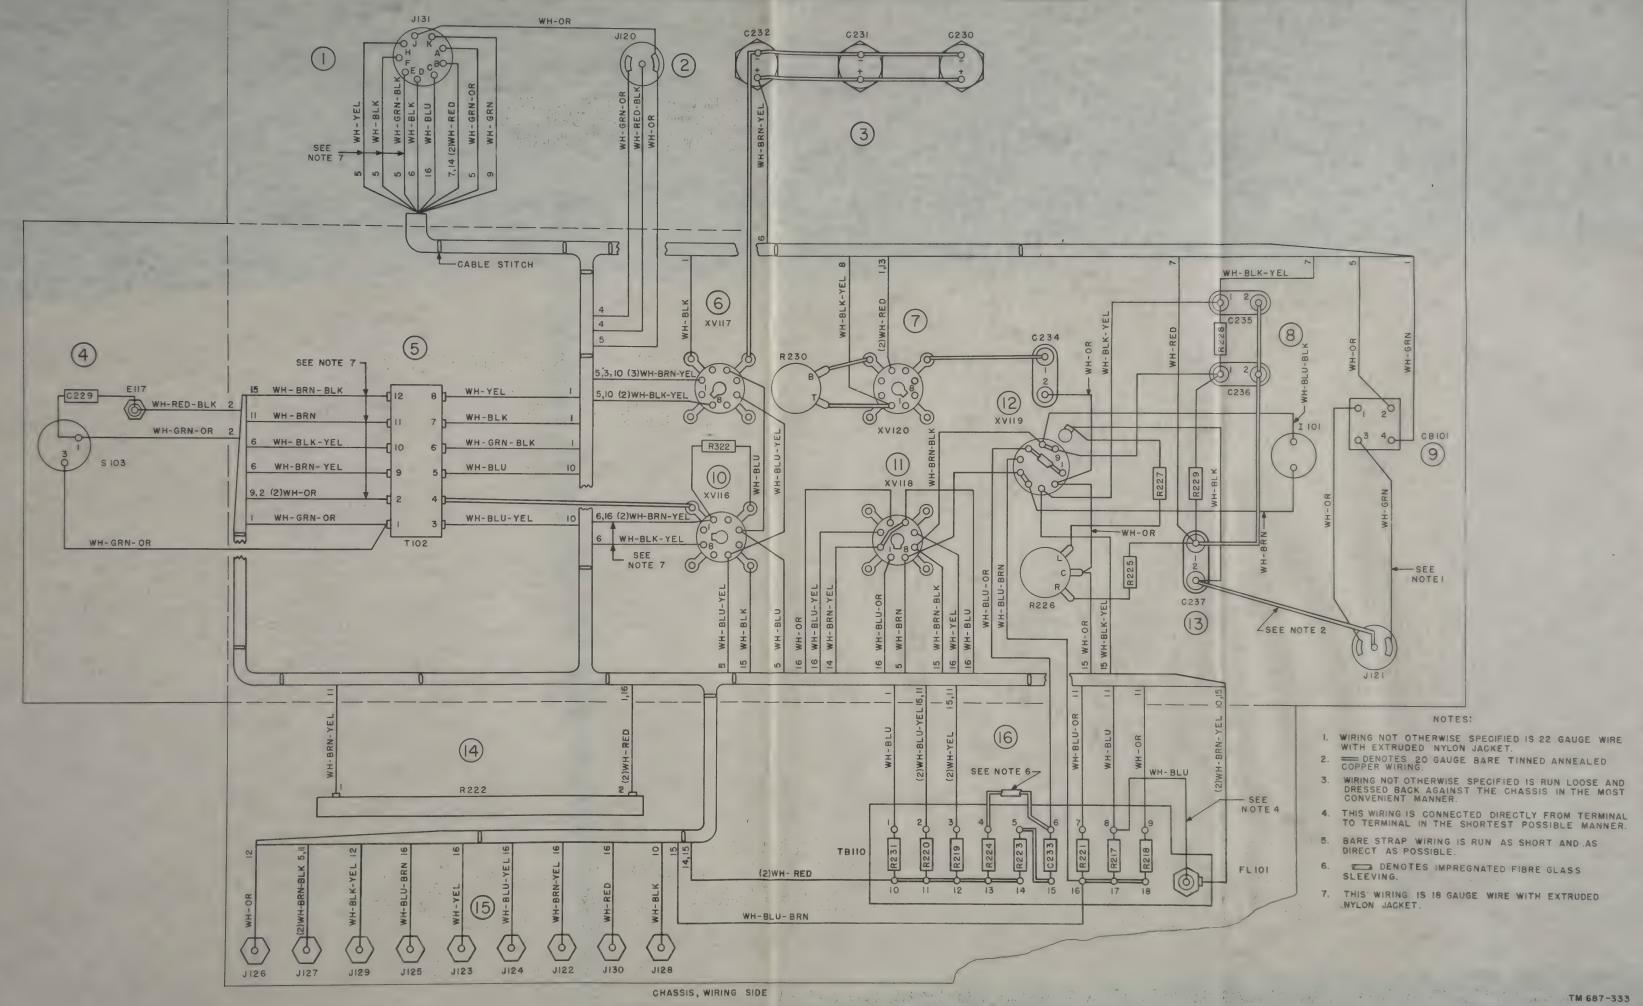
Receiver power-supply plug-in assembly, wiring diagram.
